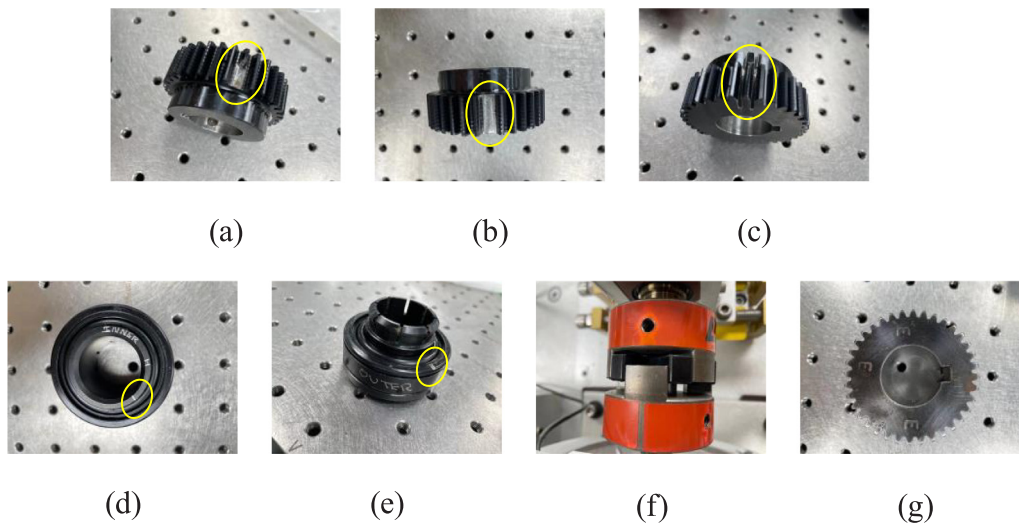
Photos of the faults. (a) Chipped tooth. (b) Missing tooth. (c) Gear crack. (d) Broken ball bearing. (e) Wear of outer race of bearing. (f) Loose fixed. (g) Gear unbalance.
